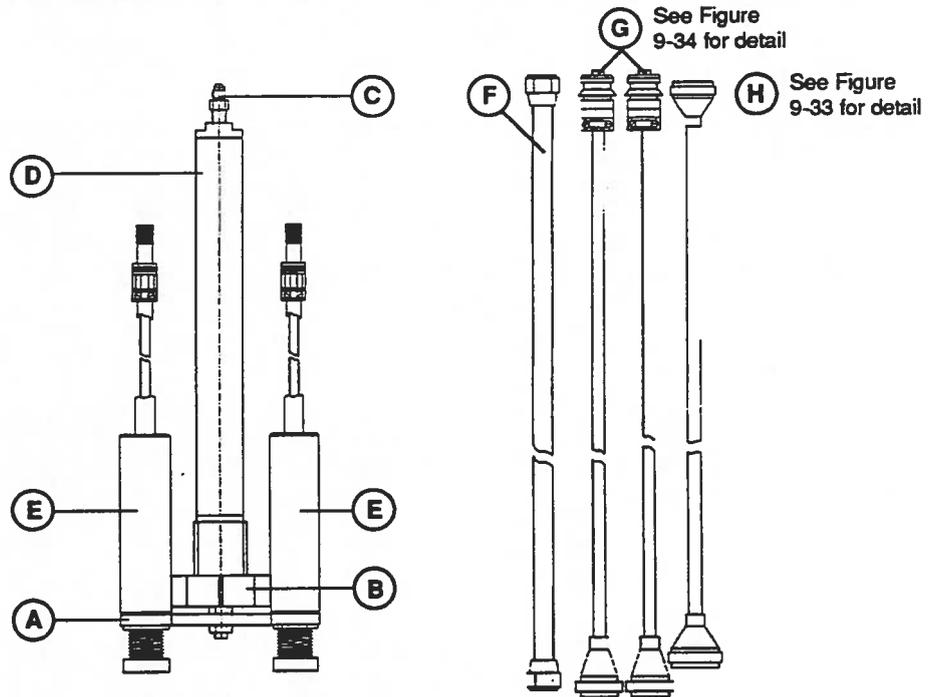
Inductive IHS Torch Mounting Assembly with Interconnecting Leads for IHS Assembly
